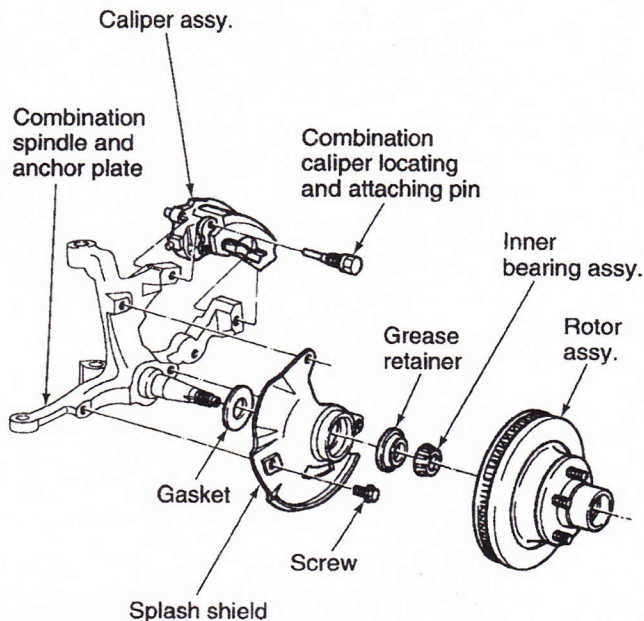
A wheel hub and disc brake assembly. Courtesy of Ford Motor Company
